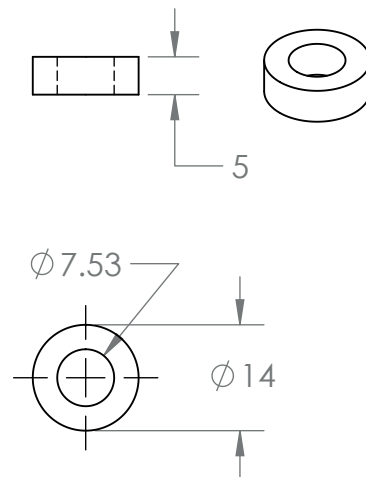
Sensor holder for the metaloxide sensor platform. This component is green in Figure 2.17. The inner radius and thickness of material must be adjusted based on metal oxide sensor dimensions. Labels are in millimeters.
